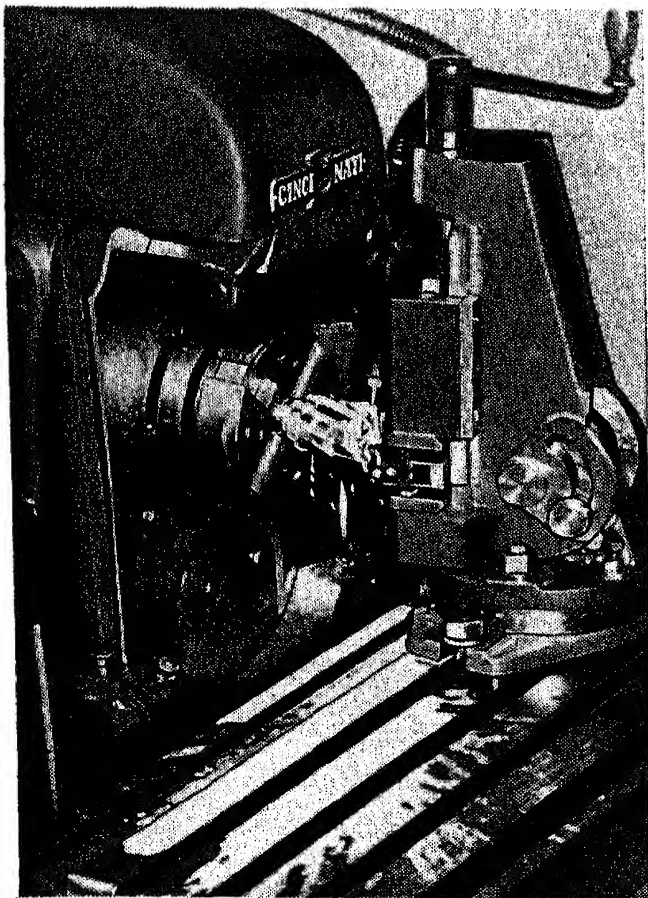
An application of a toolmakers' universal vise. (Courtesy The Cincinnati Milling Machine Co.)
